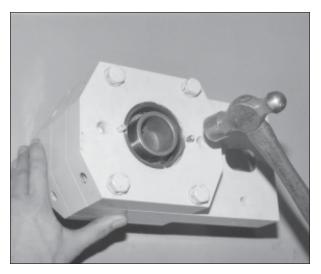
Reinstall hammer alignment pins in top plate, if necessary.
